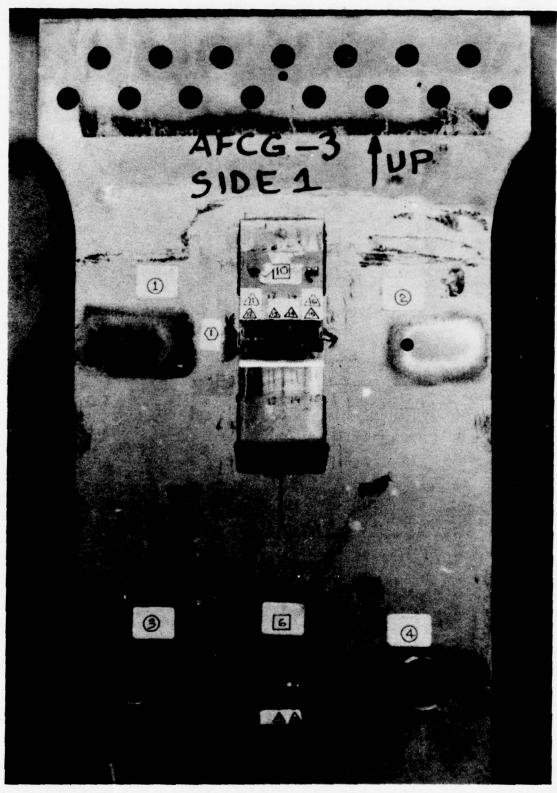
Photograph of Specimen AFCG-3 Side 1 Detail
